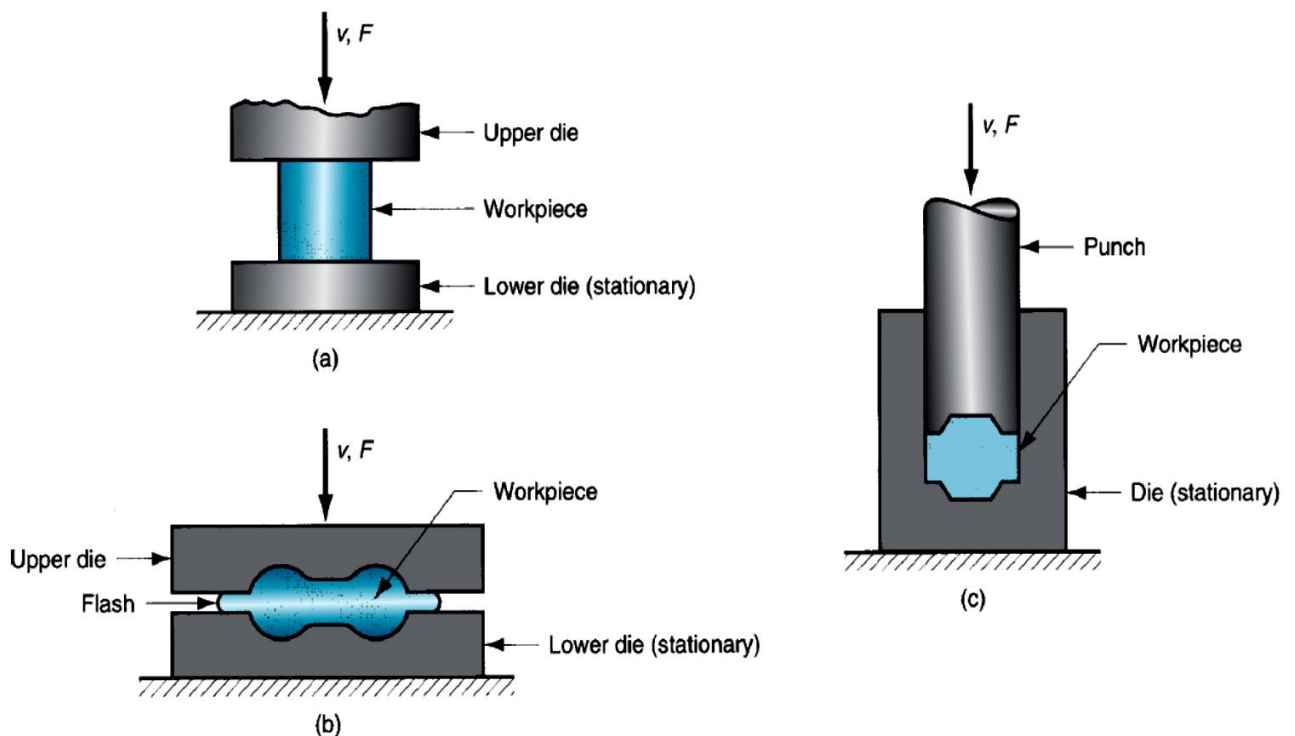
three types of forging operation: (a) open-die forging, (b) impression-die forging, (c) flashless forging
